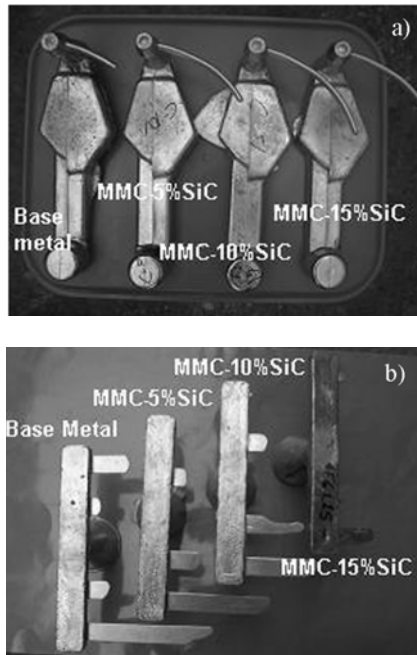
Spiral fluidity castings (a) and strip fluidity castings (b)
